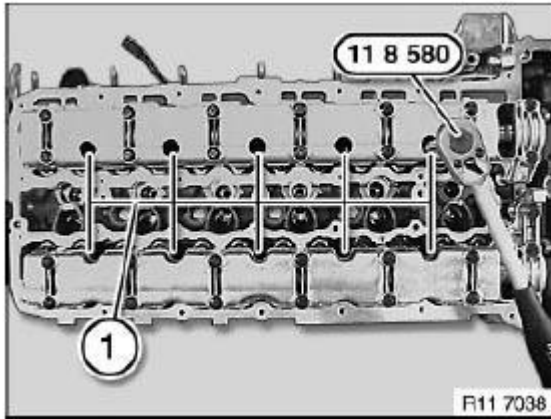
Identifying M10 Cylinder Head Bolts With Special Tool 11 8 580
